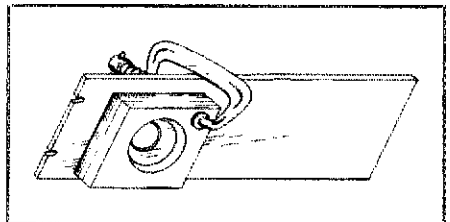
A guide block clamped over the panel allows one to cut a new, larger hole accurately.
